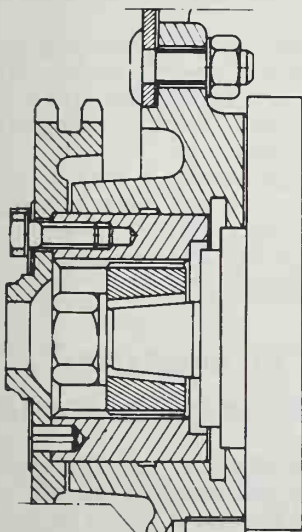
Cross-sectional view of injection pump sprocket carrier on models equipped with a timing chain.
